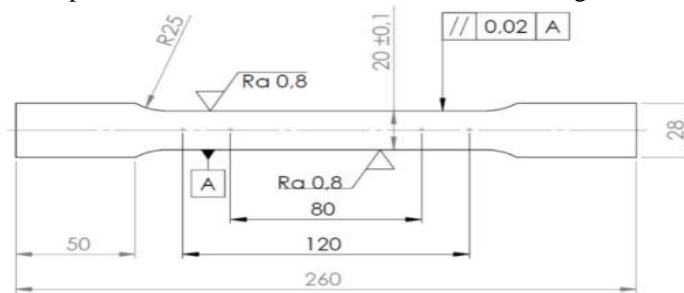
Dimensions of the tested samples for the uniaxial tensile test
